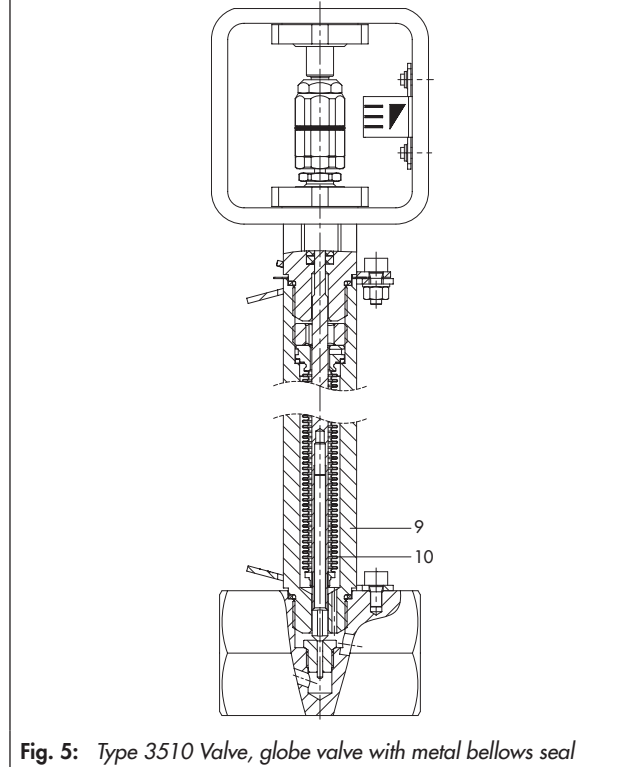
Type 3510 Valve, globe valve with metal bellows seal
